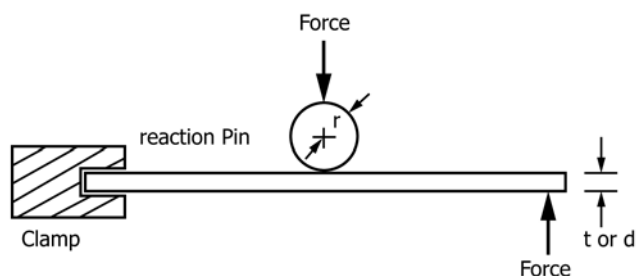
Schematic Fixture for Arrangement A, One-end-held Semi-guided Bend Test
